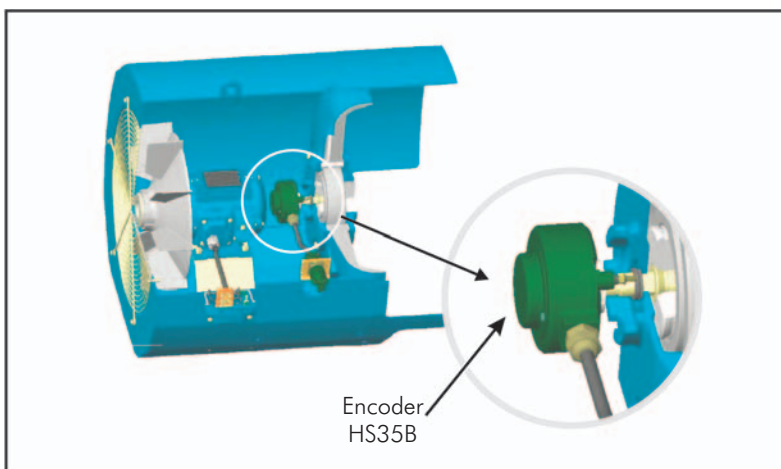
Mounting of a Dynapar HS35B encoder on a motor with forced cooling system
